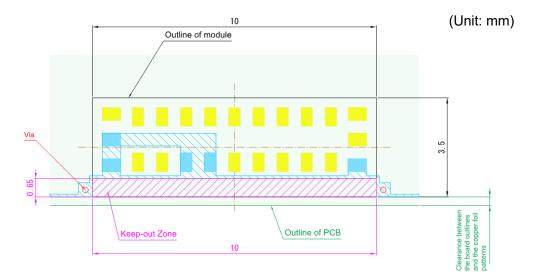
Pattern of the top layer of the PCB (Top view)
